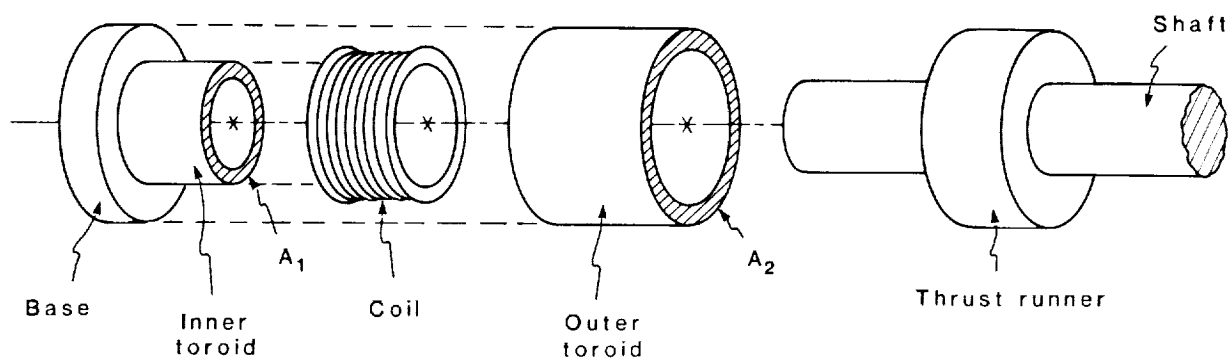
Exploded View of Single Acting Magnetic Thrust Bearing
